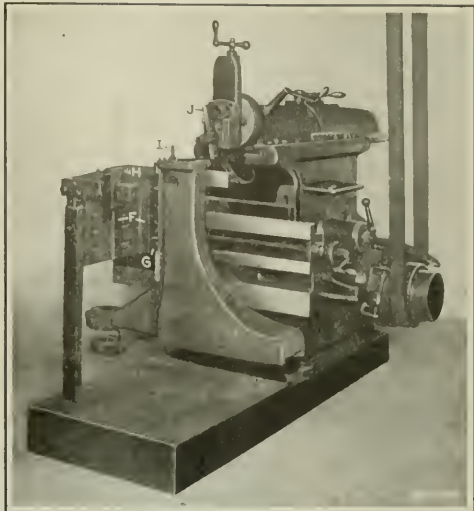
Twenty-four-inch Shaper equipped for planing the Base of the Columns of Single-spindle Drilling Machines
